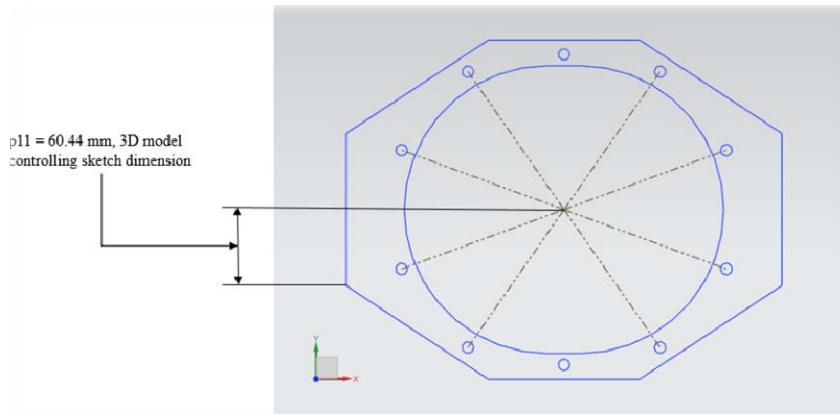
Control sketch for the rear axle housing (Patel, 2017).
